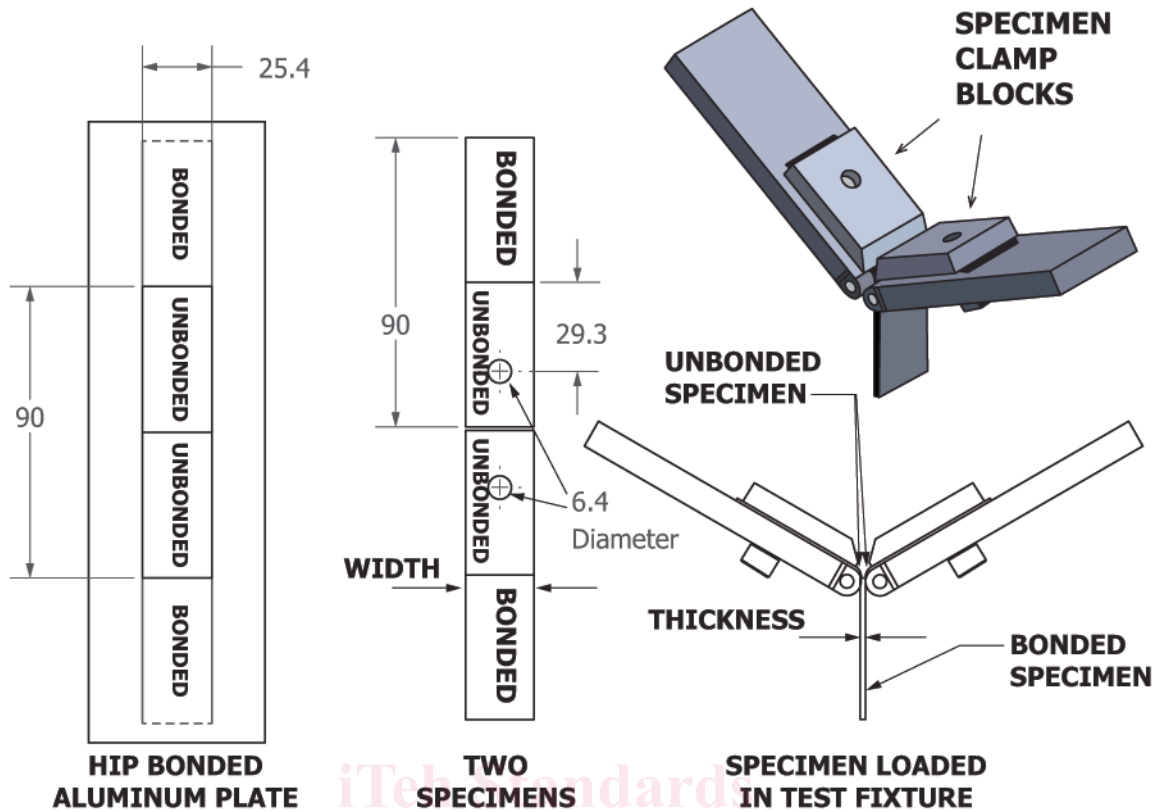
Test Panel and Test Specimen (dimensions in mm)
